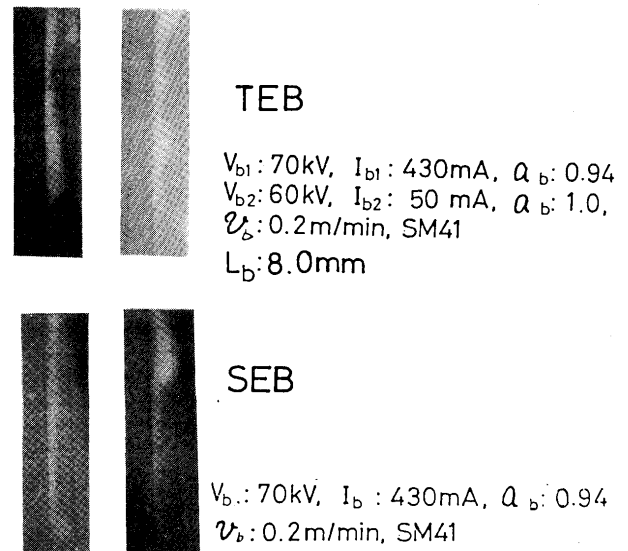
Comparison of beam hole shapes between advancing angle TEB welding and SEB welding.
